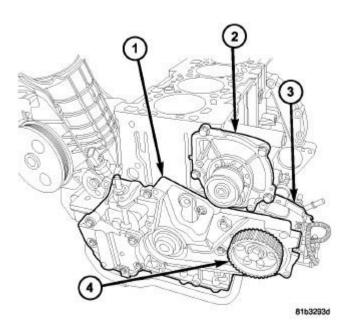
OIL PUMP COVER ASSEMBLY Courtesy of CHRYSLER LLC
